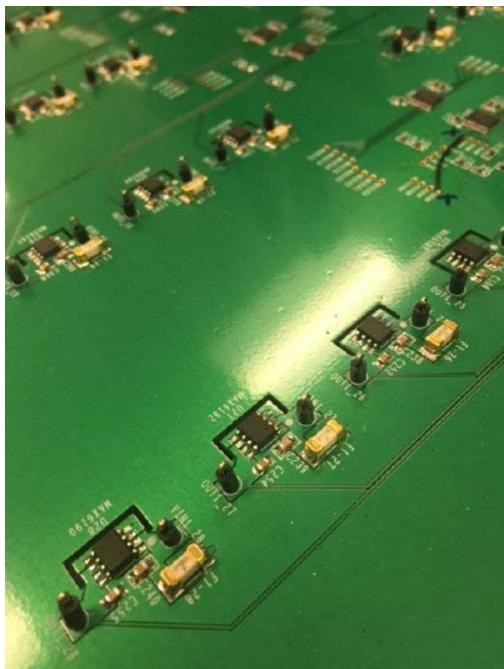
Three-side cut-out "slotting" to relieve solder joint stress.
